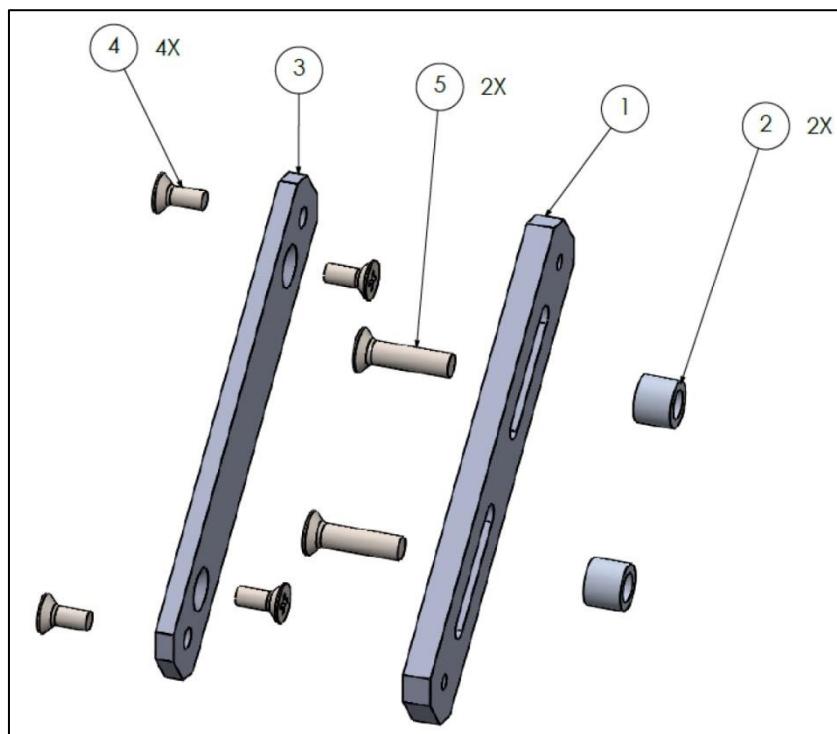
iCOMOX SMIP Mounting Kit Adaptors
